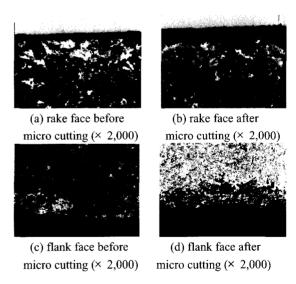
SEM photographs of tool wear shape on rake and flank face of PCD tool in micro cutting of WC-Co V60 after 30mm cutting distance [$v=10\mu m/s$, $t=10\mu m$, $\alpha=12^{\circ}$, $\beta=6^{\circ}$]
